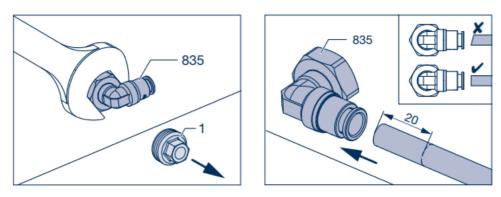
Connecting the air AirSave angle piece to the axle and the 8 mm pipe to the angle piece.
